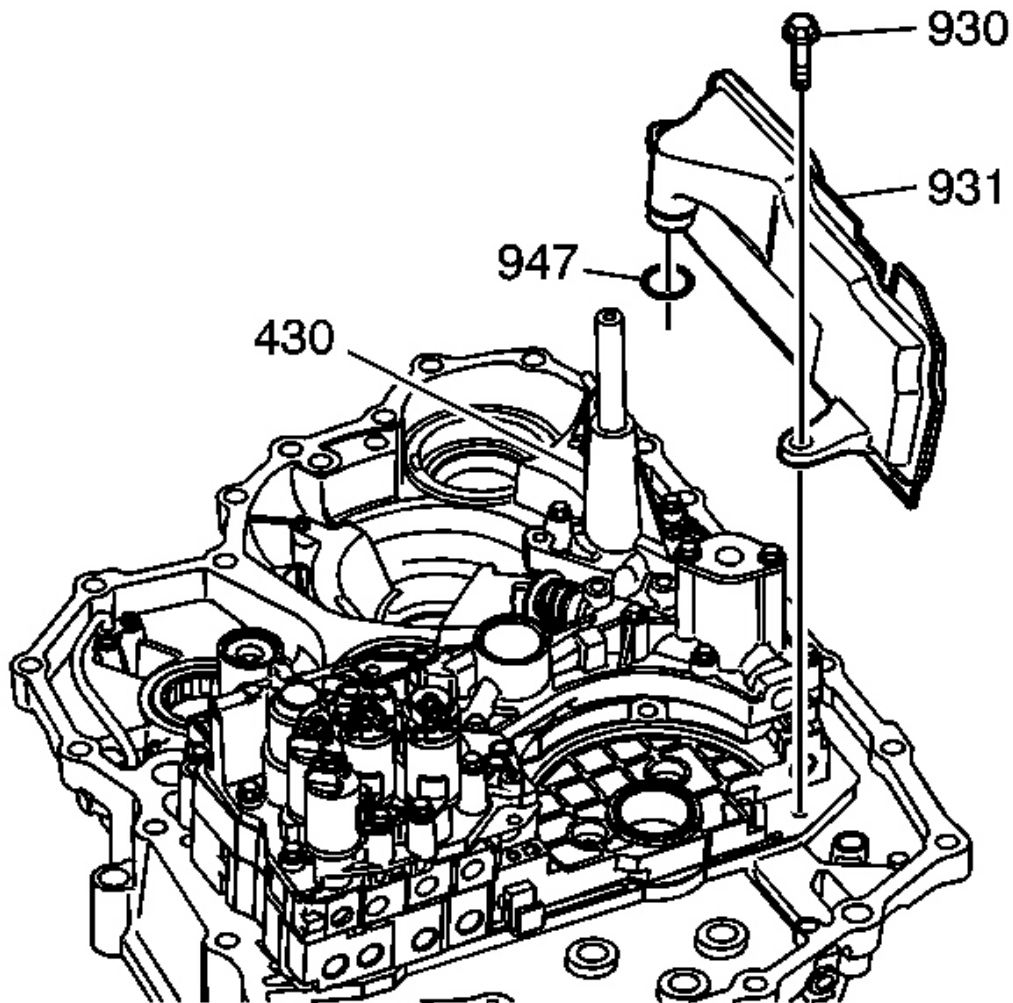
Regulator Valve Body, Transmission Fluid Filter & Bolt
